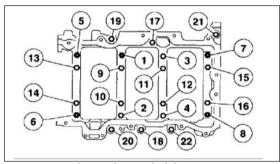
Ford 3.0L bearing bedplate torque sequence.
